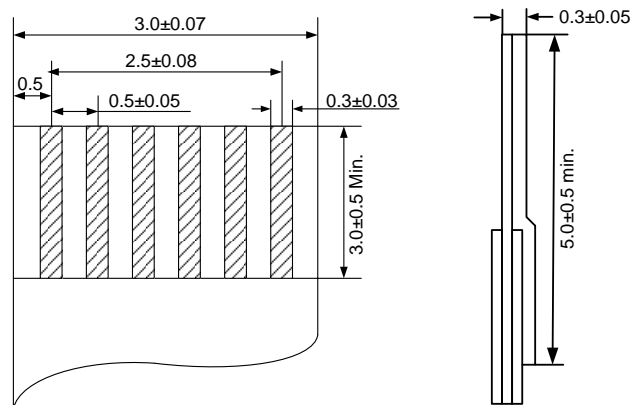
Dimensions of 6-pin 0.5mm pitch FFC/FPC Cable
